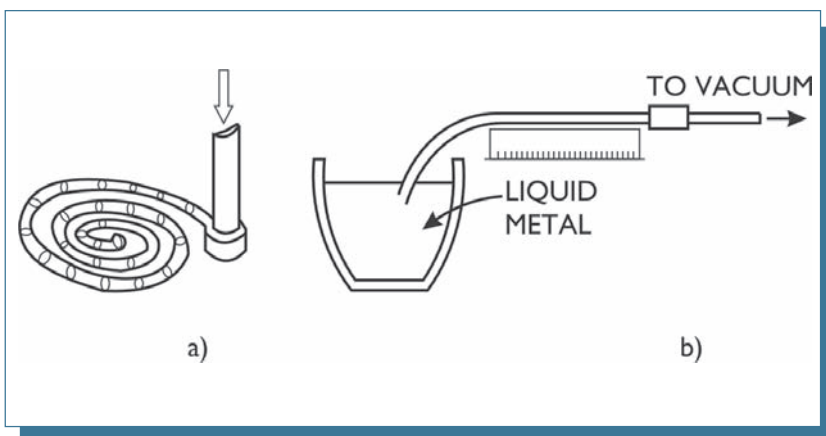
Scheme of two fluidity tests: a) spirals test: the molten metal is poured in a spiral-shaped mould; b) vacuum test: the molten metal is sucked through a tube by a vacuum pump [2]
